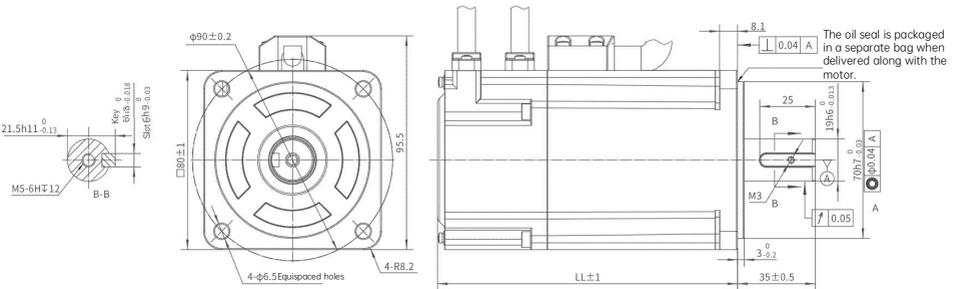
Frame No. 80 servo motor dimensions (with brake)
